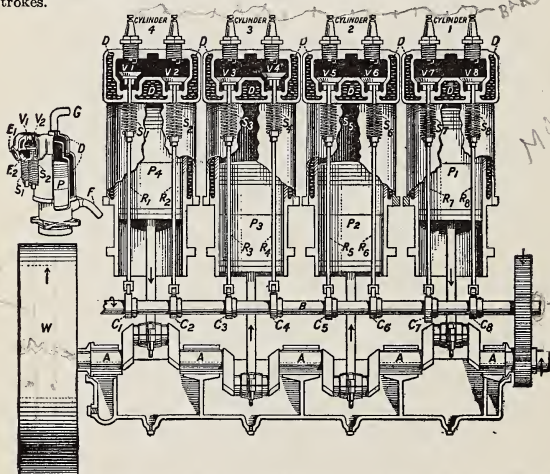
The working parts of a modern four-cylinder automobile, or launch engine. *A*, main shaft; *W*, balance-wheel connected to main shaft; *P*₁, *P*₂, *P*₃, *P*₄ pistons; *V*₁, *V*₃, *V*₅, *V*₇, inlet valves; *V*₂, *V*₄, *V*₆, *V*₈, exhaust valves; *R*₁, *R*₂, etc., valve stems; *S*₁, *S*₂, etc., springs by which valves are closed; *B*, cam-shaft for operating valves, run by gears from main shaft; *C*₁, *C*₂, etc., cams for lifting valves; *D*, space to contain circulating water for cooling cylinder. The small diagram in the upper left-hand corner shows the connection between the valve-chamber and cylinder. *E*₁, inlet port; *E*₂, exhaust port; *F*, pipe by which cooling water enters; *G*, outlet for water. Two spark plugs are shown inserted at the top of each cylinder. One is connected with a battery system of ignition, the other with a magneto or dynamo. The electrical connections are so made that either may be used at will.
